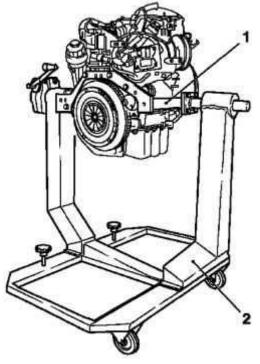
The engine installation on a special stocks: 1 - head, 2 - biscuits
